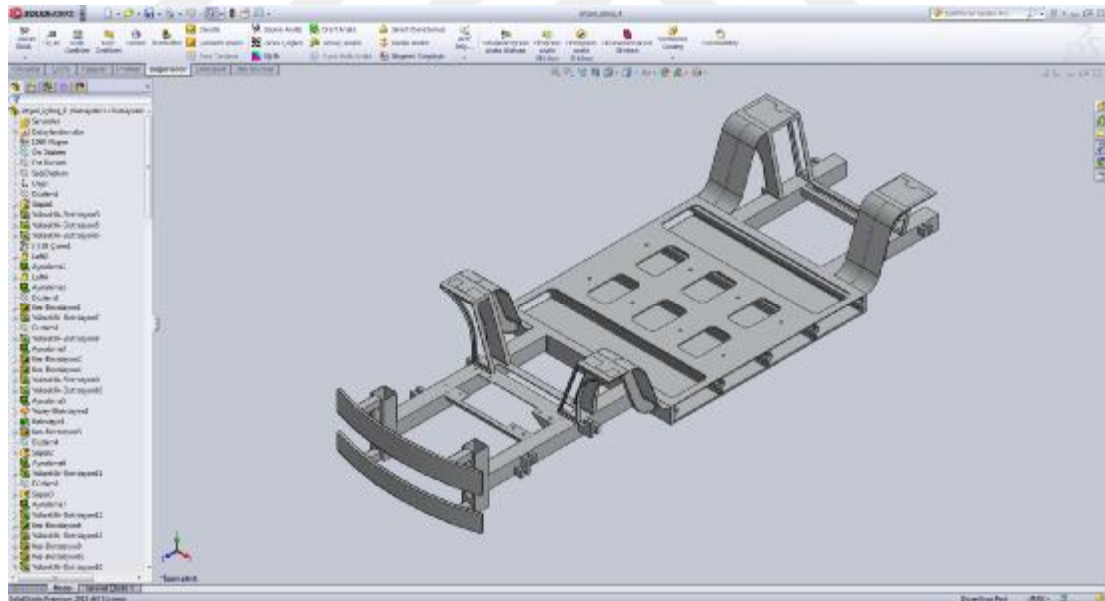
General view of the aluminum platform chassis in SolidWorks software.
